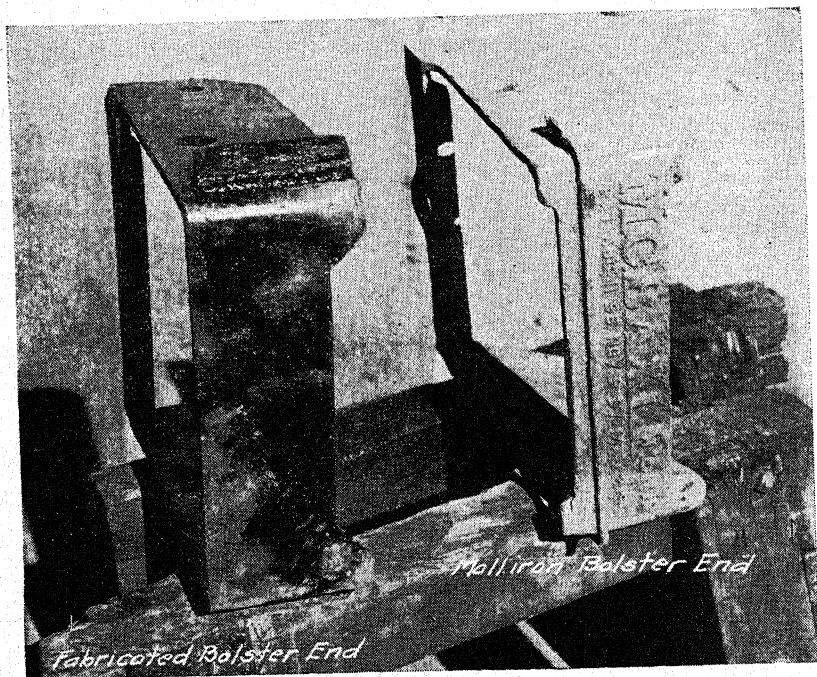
Arc welded (left) and cast iron bolster end for freight car.
